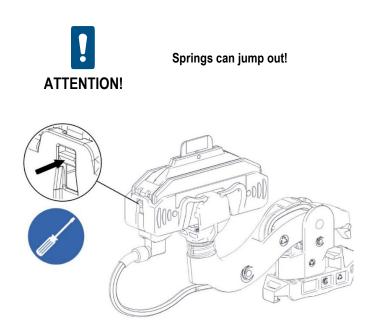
Carefully press nose in collector housing inward with flat-head screwdriver
